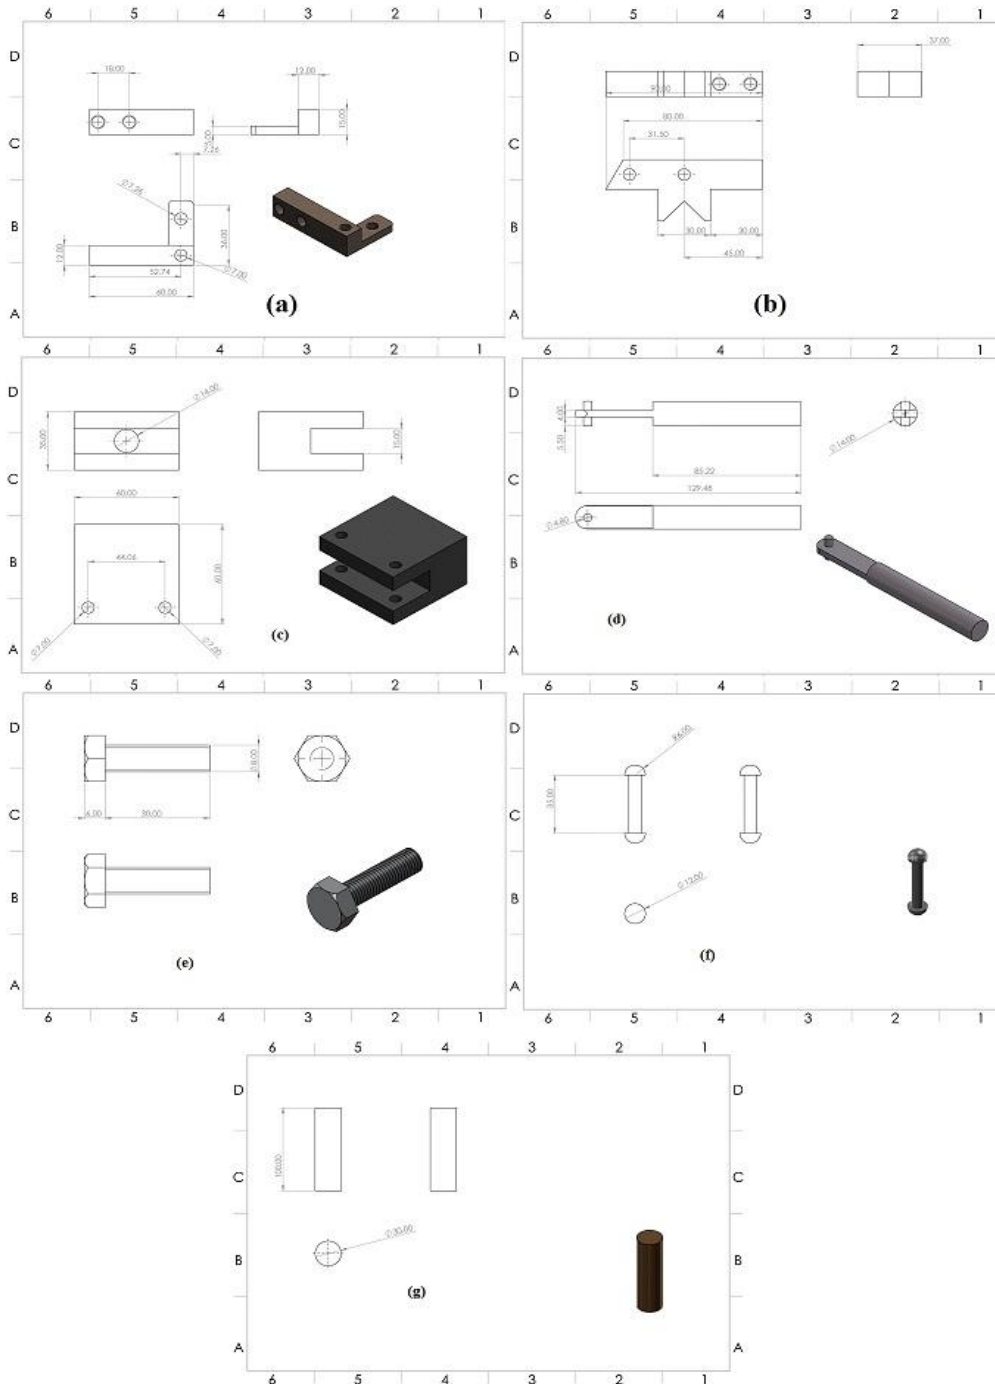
Dimensions of all the components (a) Gripper end (jaw grip) (b) gripper (jaw) (c) wrist (main body) (d) puller rod (push rod) (e) bolt (f) rivet (g) shaft
